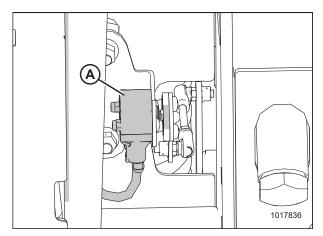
Optional Two-Sensor Kit – Right Sensor
